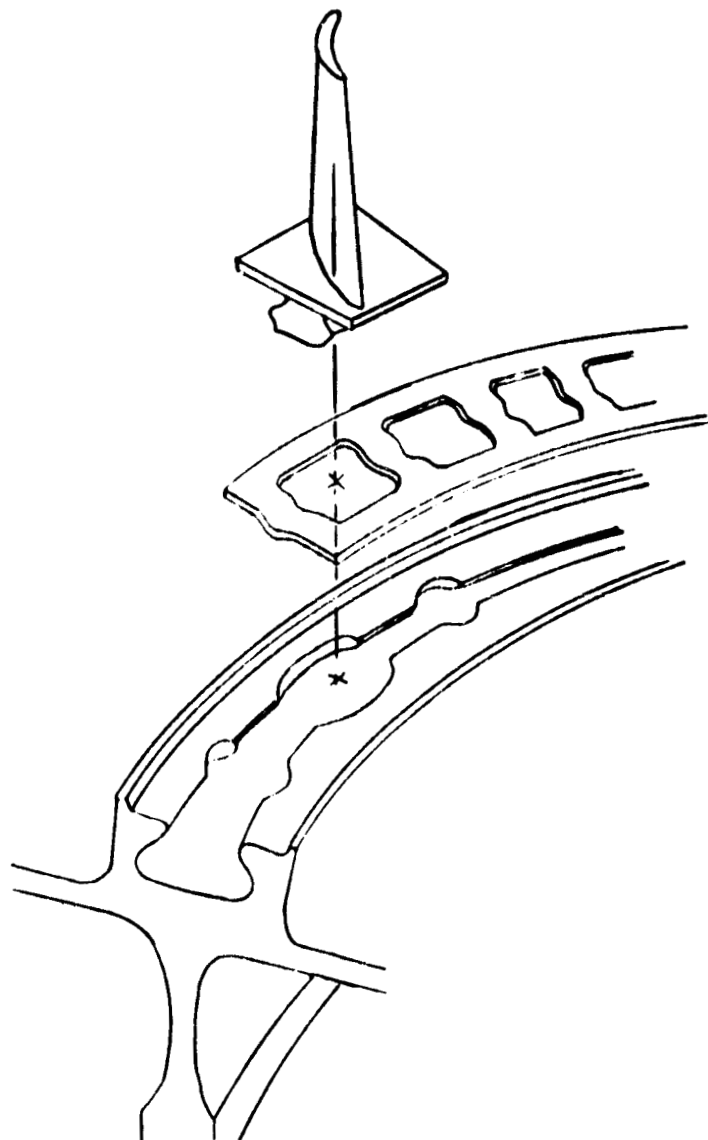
High-Pressure Compressor. Ladder seals prevent compressor blade platform leakage.
